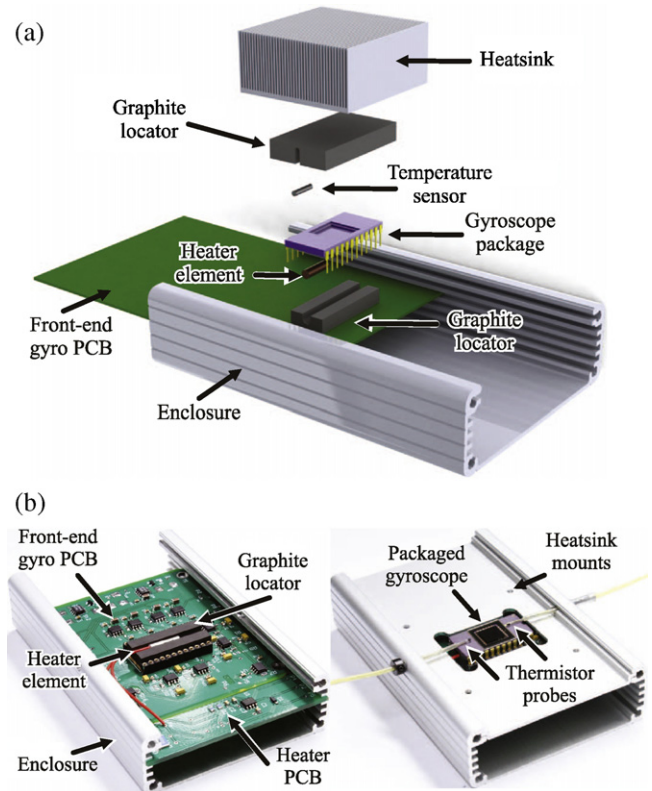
The custom-built package-level resistive heater assembly for thermal calibration of a gyroscope. (a) Exploded view of the assembly model in Solidworks. (b) Photographs of assembly process showing heater element, gyroscope and temperature sensor locations.
